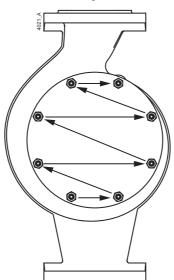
Sequence of loosening the lantern piece fastening nuts.
